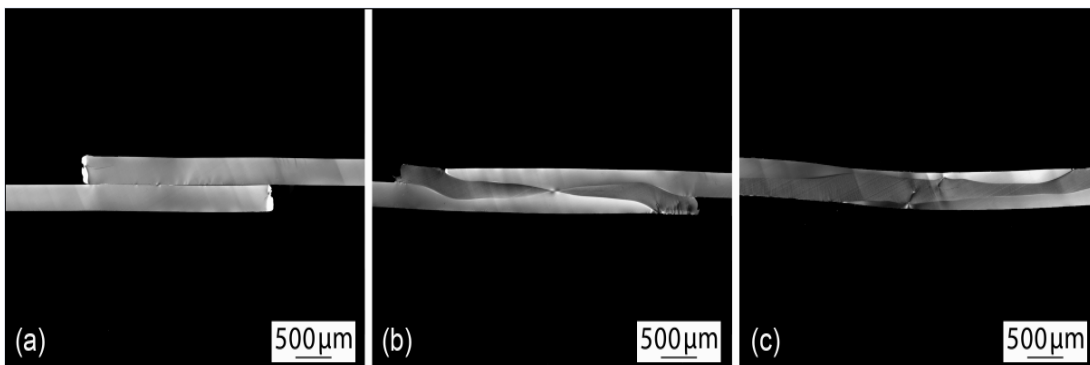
Micrographs of ultrasonic welded PLA films, 305  $\mu\text{m}$  thickness, detailing weld line and squeeze flow (left: welded 0.15 sec, center: welded 0.25 sec, right: welded 0.35 sec)
